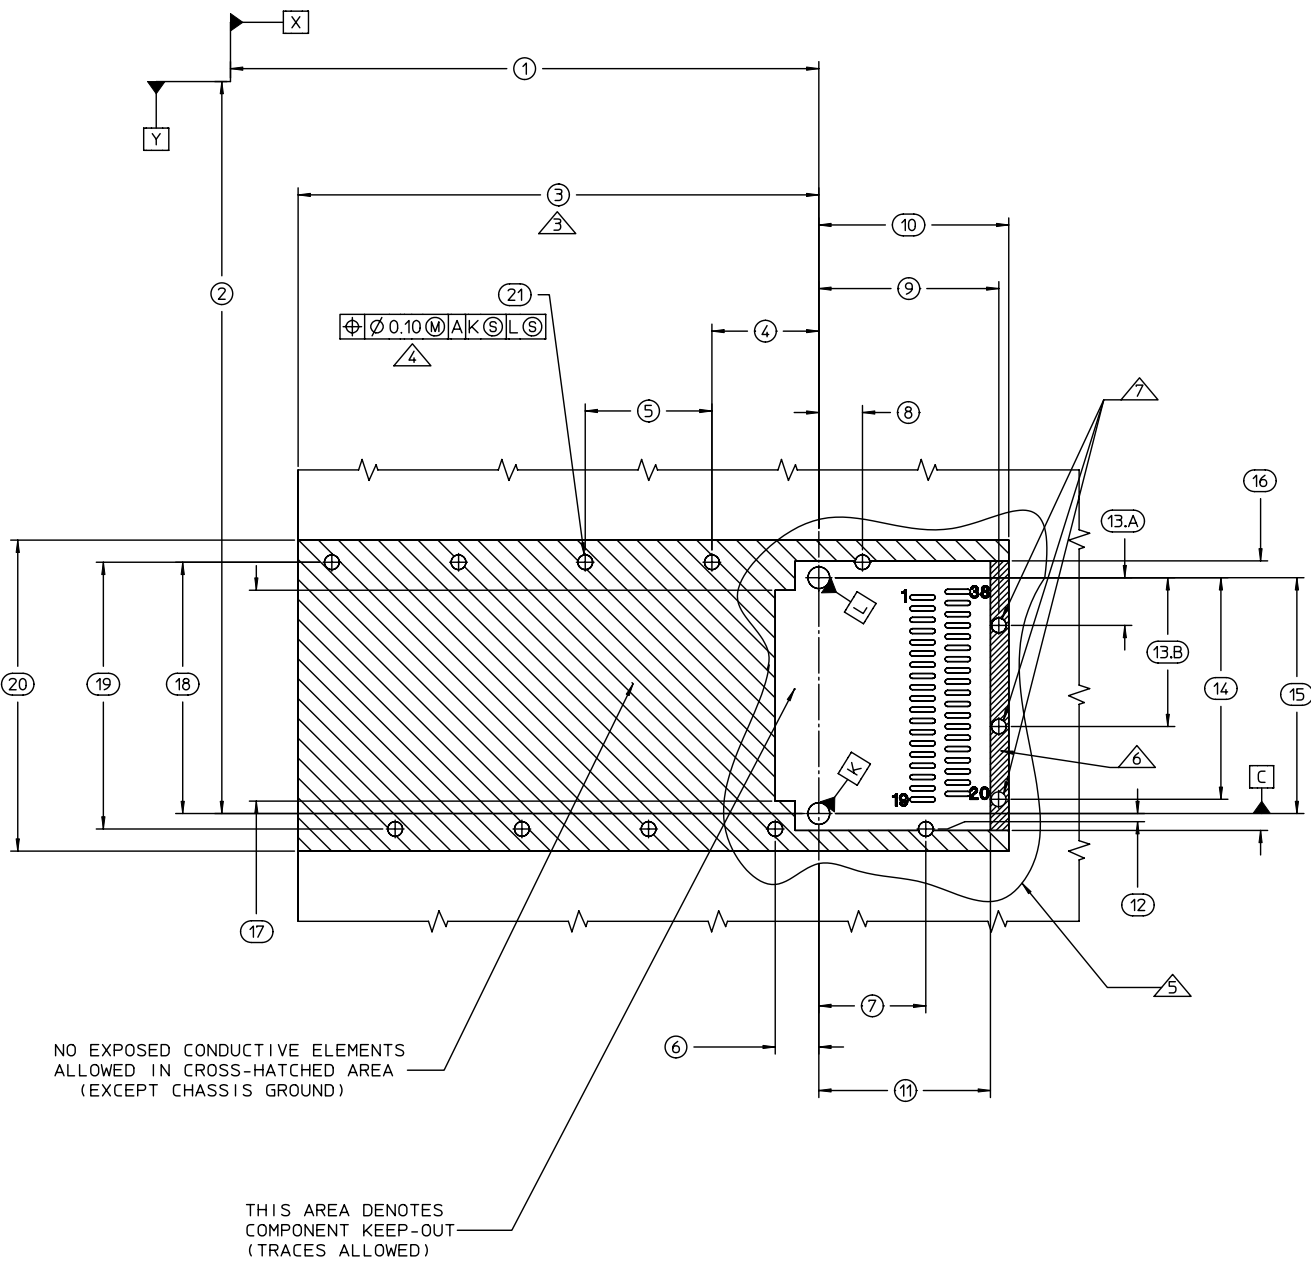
PLUGGABLE MODULE CAGE DIMENSIONS (2 OF 2)
